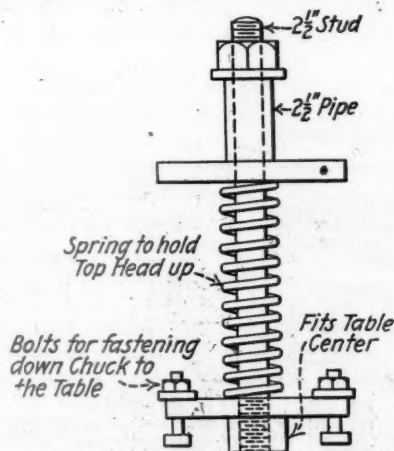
Chuck for Clamping Crown Brasses on the Boring Mill While Grooving Them for Shoulders
